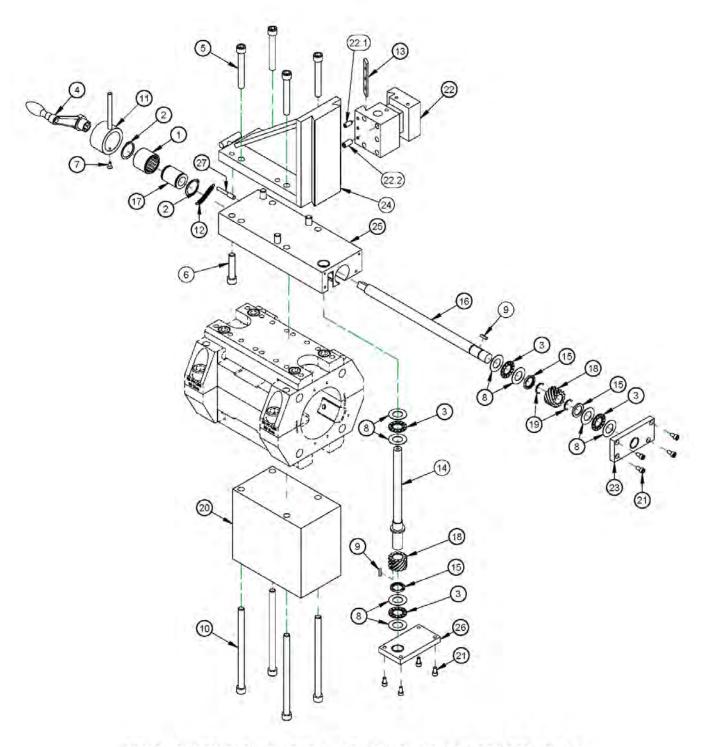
Stack up blocks assembly parts list (P/N 81252)
